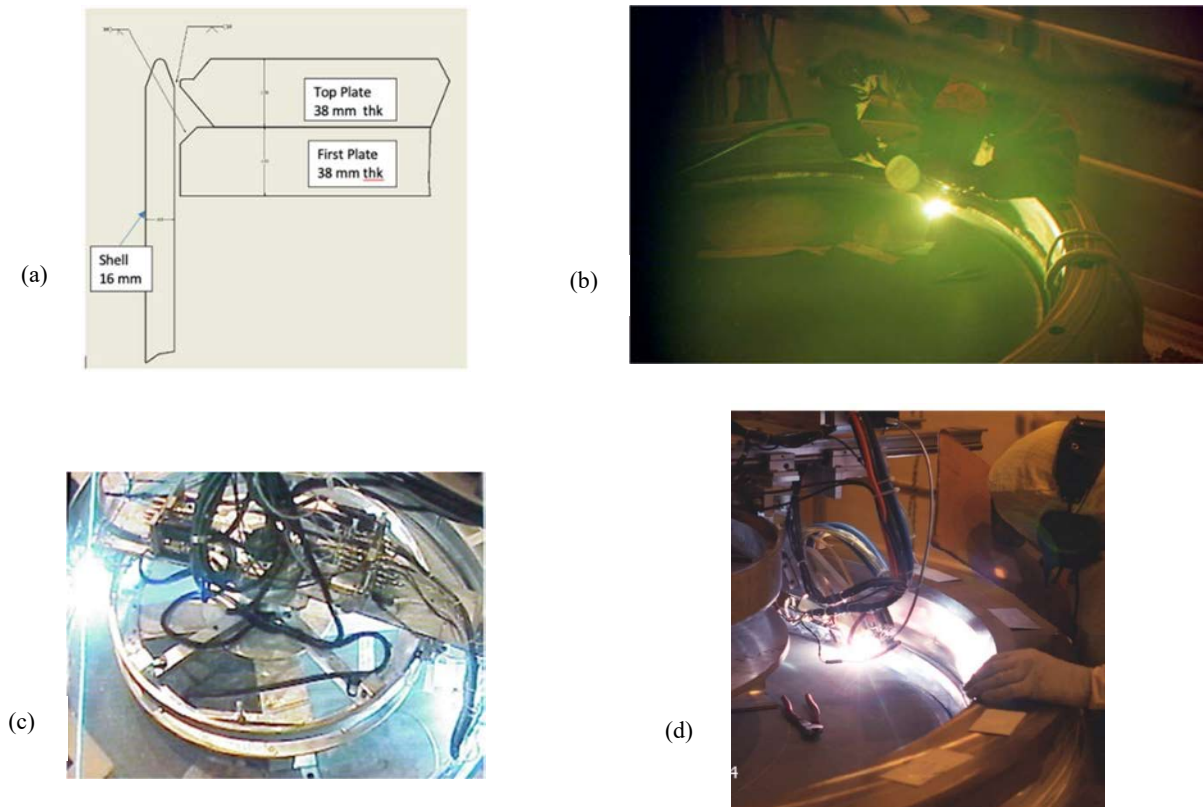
(a) Dry shielded canister lid closure weld configuration (based on data from [279]). (b) Manual DSC lid welding. (c) Welding machine operation. (d) Semiautomatic welding of DSC lid (courtesy of INL).
